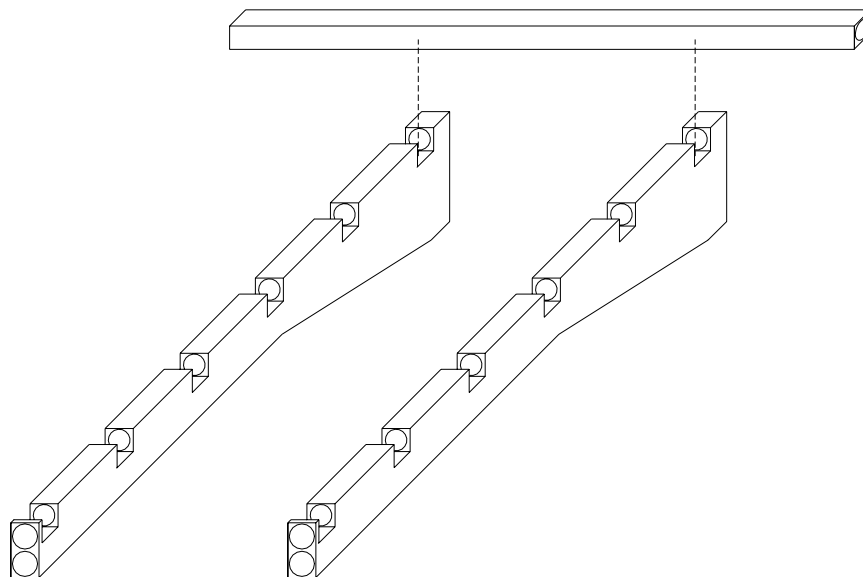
Section of Concept Four Chassis without Deck or Reinforcement
